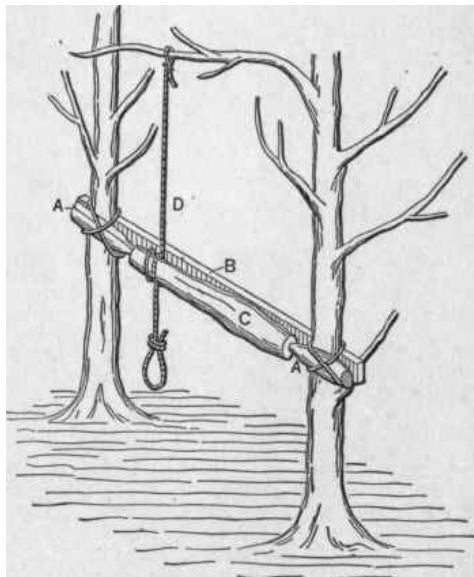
Ancient lathe [1] with (A) workpiece holding pivots, (B) tool support, (C) workpiece and (D) power transmission cord
